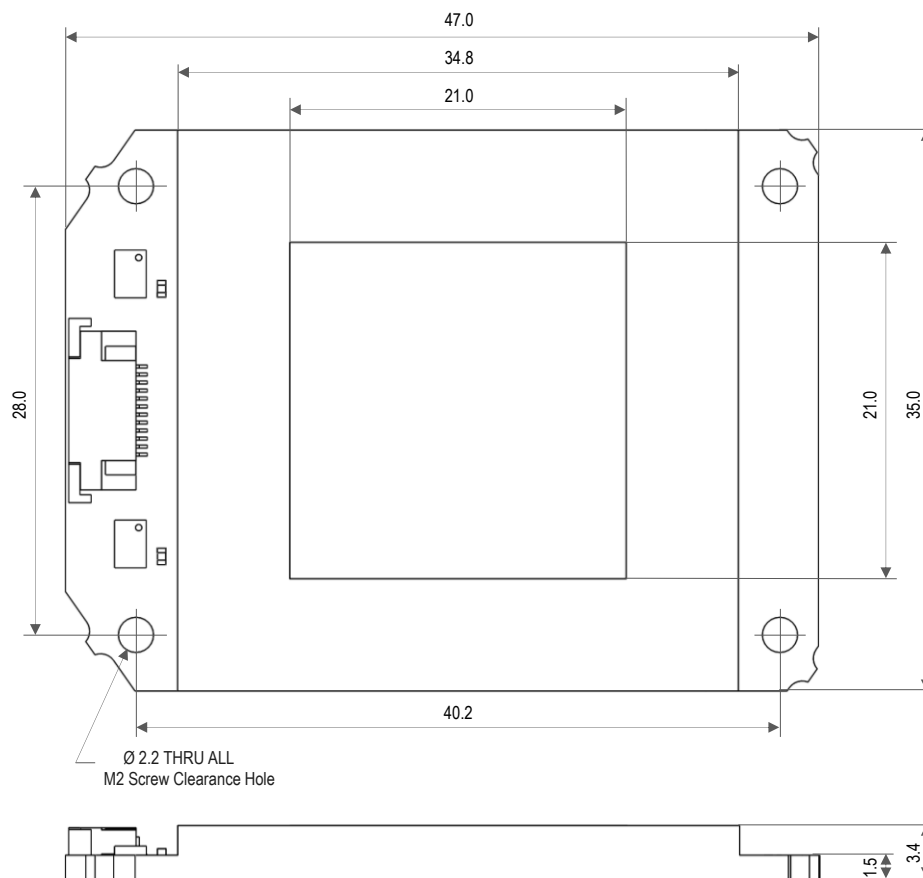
Mechanical drawing of the unmounted BSW-20. Units: mm.
